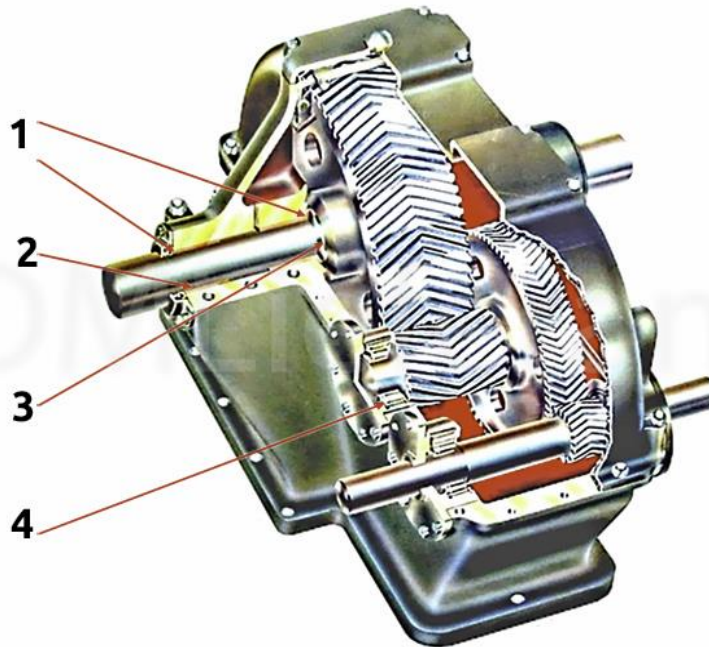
The gearbox of the American company "Lufkin" (USA) with sliding bearings on the driven shaft.
